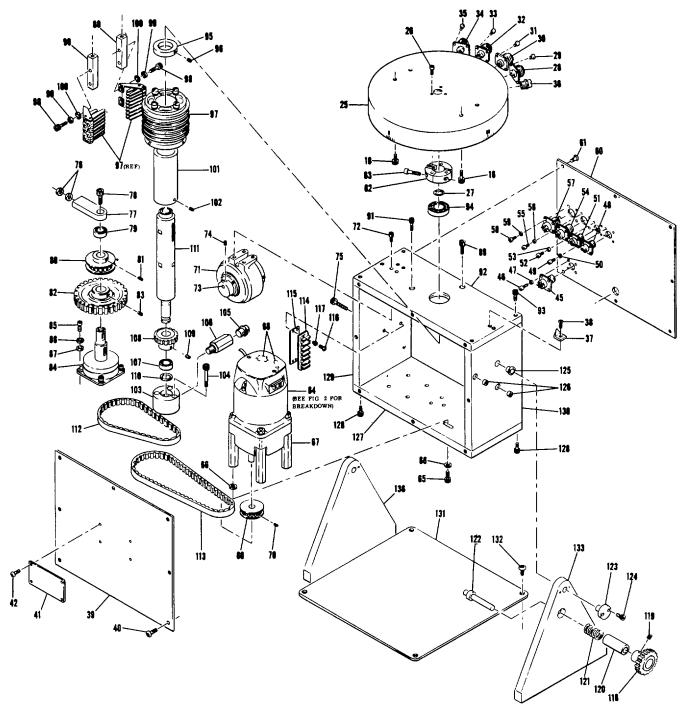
Gyro Tester, Indicator Assembly (Sheet 2 of 3)
